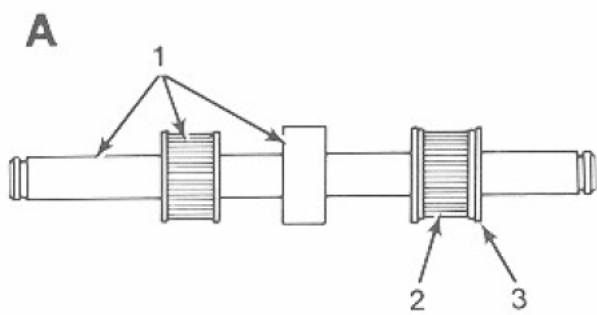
OBA—4 Transport Roller And Shaft Assemblies
